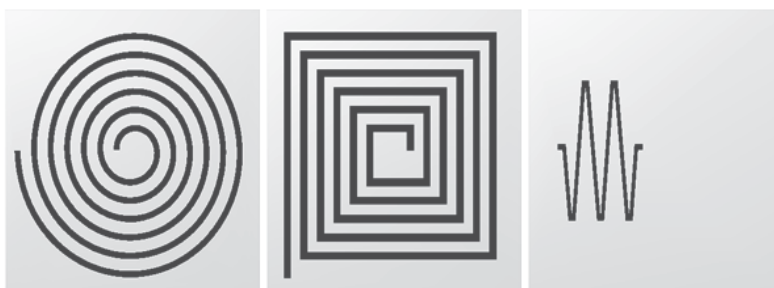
Spiral, square spiral and zig-zag designs of a testing mould.
